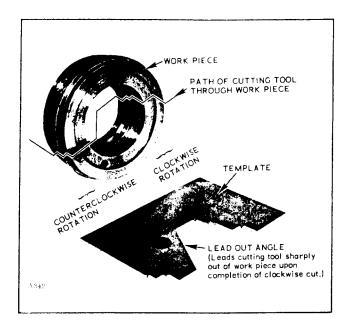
Typical Work Piece and Facing Template Used to Produce the Part
